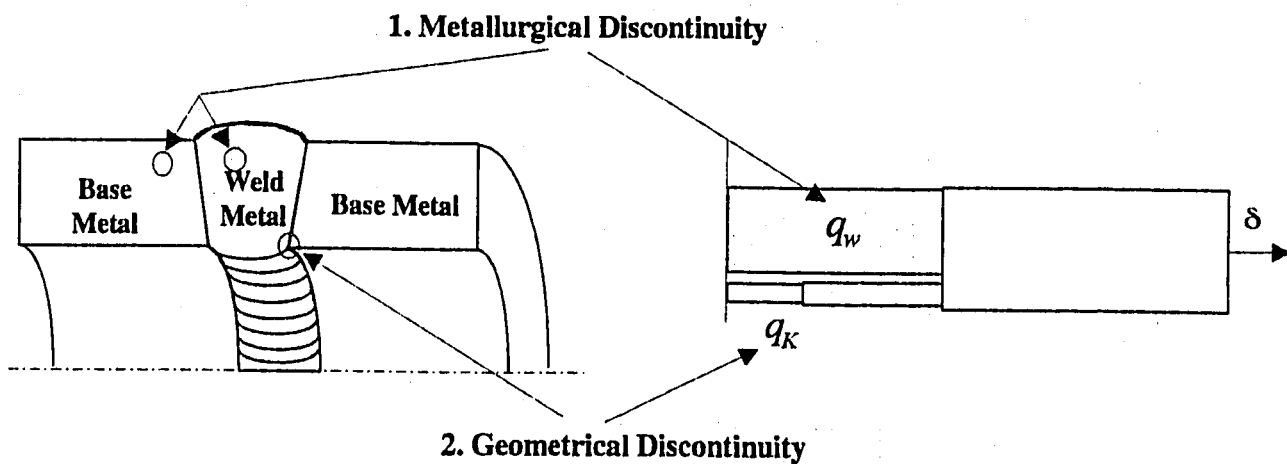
Stress Concentration Factors at Welded Joints in A Welded Vessel
